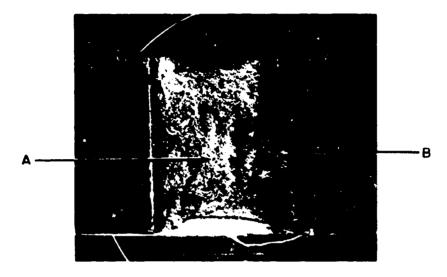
Fracture surface of a temper-embrittled A-514 plate fatigue specimen, 10x.
